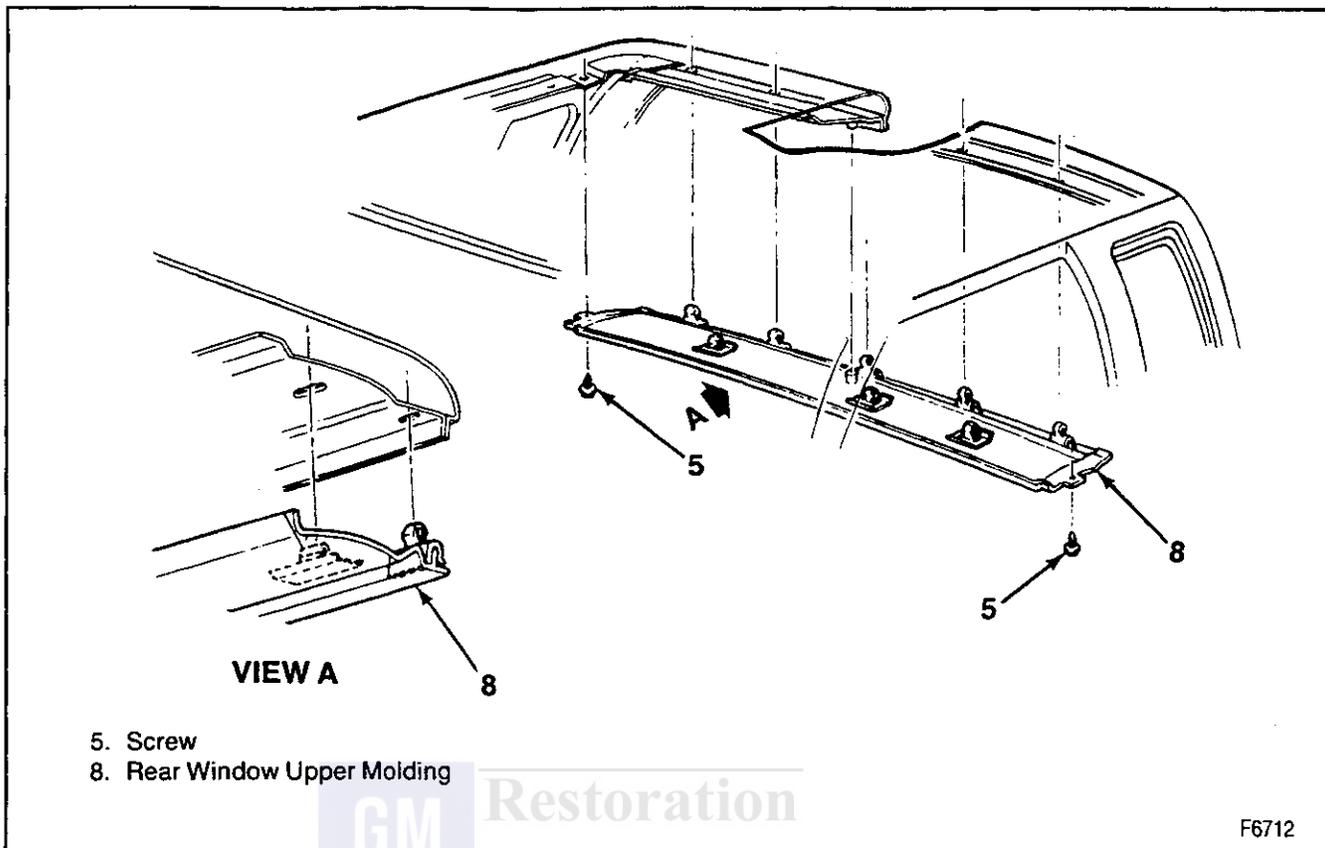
Rear Window Upper Garnish Molding (Extended Cab)
